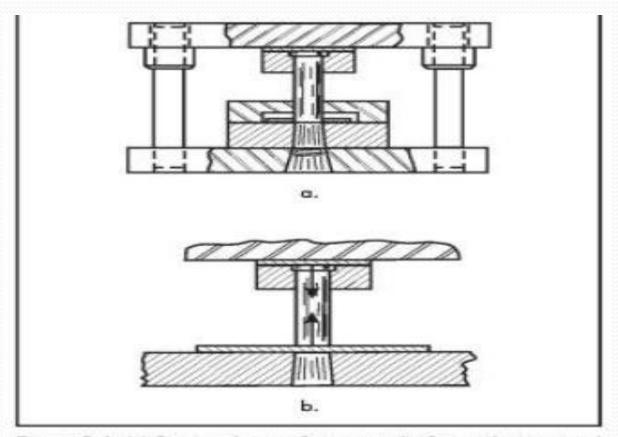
(a) Sectional view of a cutting die for producing round holes; (b) the punch is compressed after making initial contact with the stock (Smith 2001).
